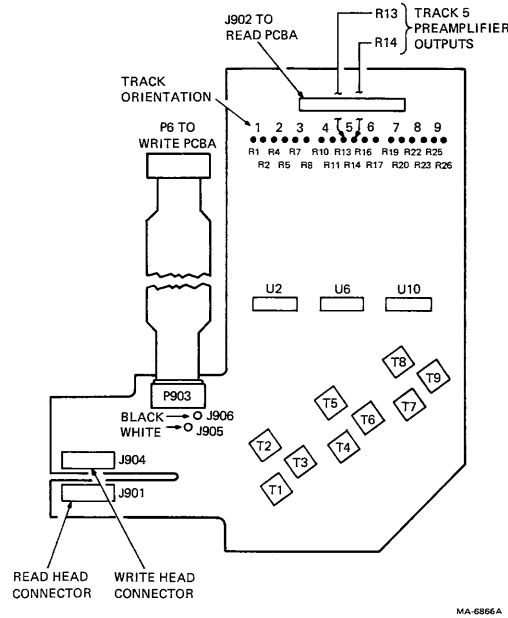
GCR/PE Preamp 1 PCBA Test Points
